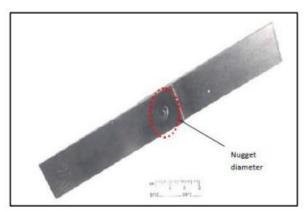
Specimen of Sheet Metal which is Lap Joints after RSW
